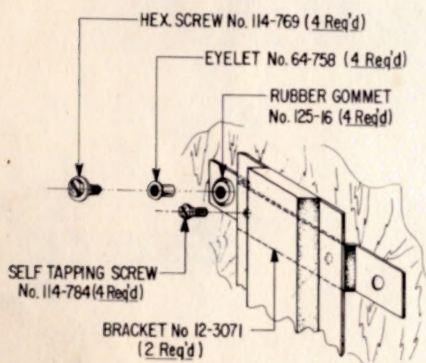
A — Exploded View, Reverberator Bracket and Unit Mounting on Models G2780, G3388 and Stereo Phono Models
